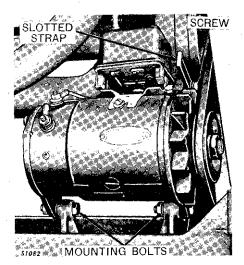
Generator Mounting Bolts, Adjusting Screw and Strap
